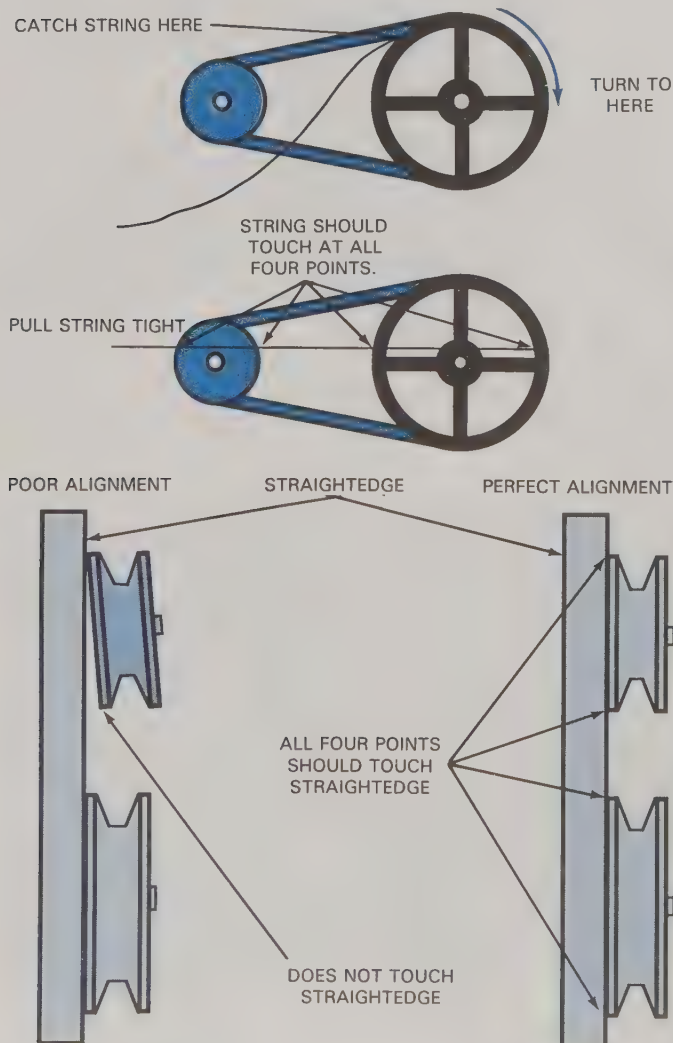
A string or a straightedge can be used to check proper alignment of the flywheel and motor pulley. The string method is shown at top; the straightedge method at bottom.
